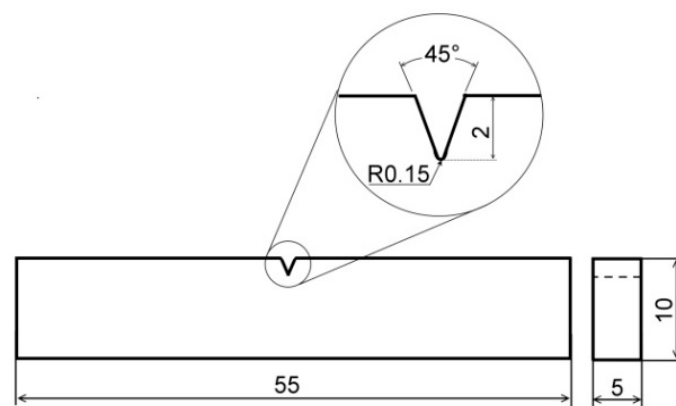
Schematic Charpy V-notch (CVN) impact bending test specimen. All dimensions are in mm.
